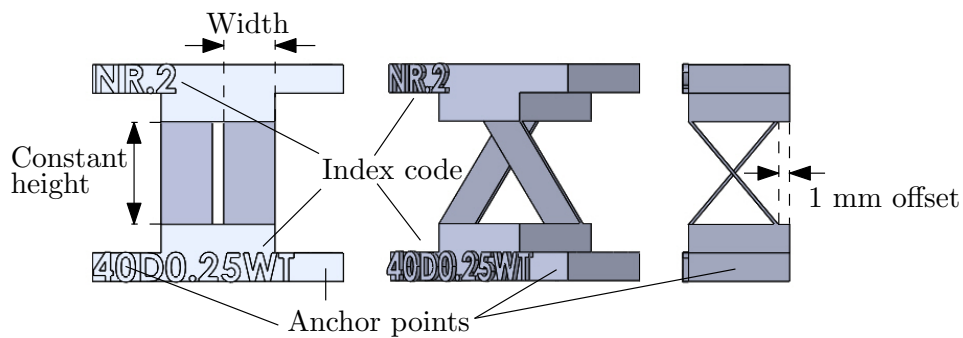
Front, angled and side view of the CAD design of a CAF.
